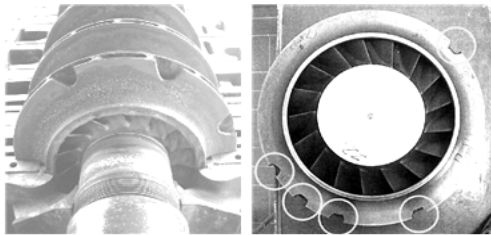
Fatigue failures on a close type impeller[4,5].
